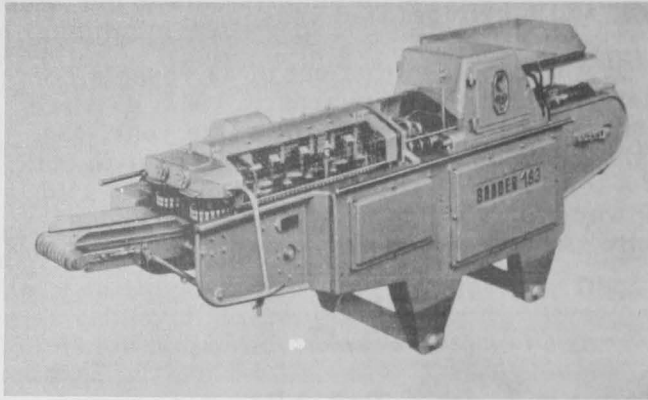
Design of the base of the new fish-gutting machine allows for a conveyor to be placed underneath the machine for removal of the offal. The handle on the left hand side permits the tilting and lifting of the upper assembly for better access to the cutting tools for maintenance and cleaning.
